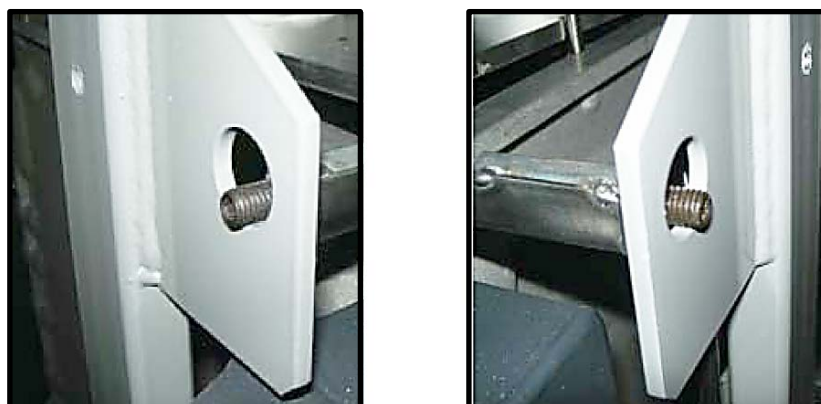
Location of Burner Assembly Lifting Screw (Step 9)
